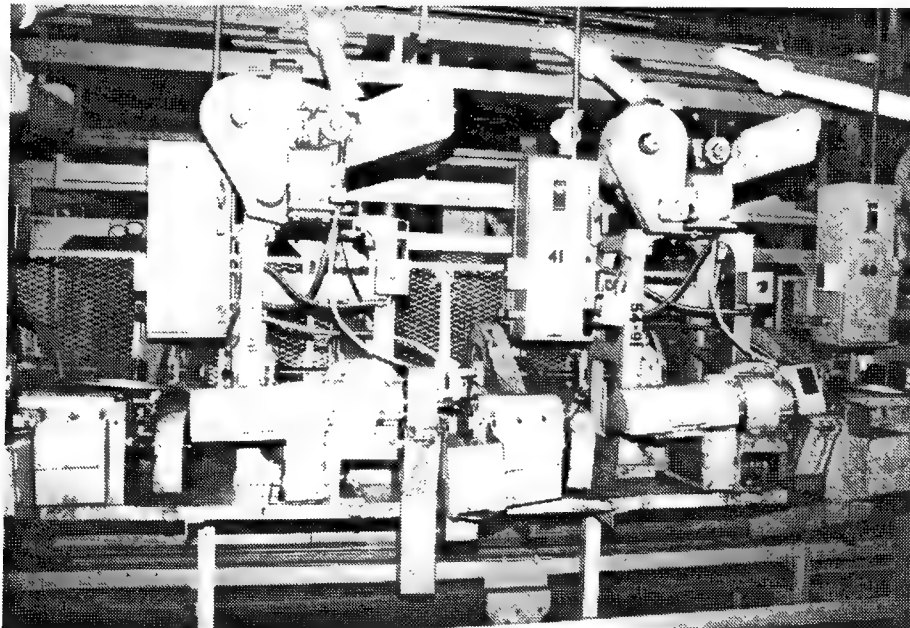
Building 4: Case Head Turn Machine manufactured by Standard Knapp.
